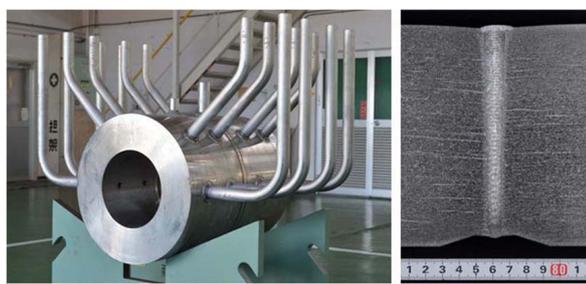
Exterior view of the HR6W superheater outlet header mock-up and the longitudinal cross-sectional macrostructure of the circumferential weldment
